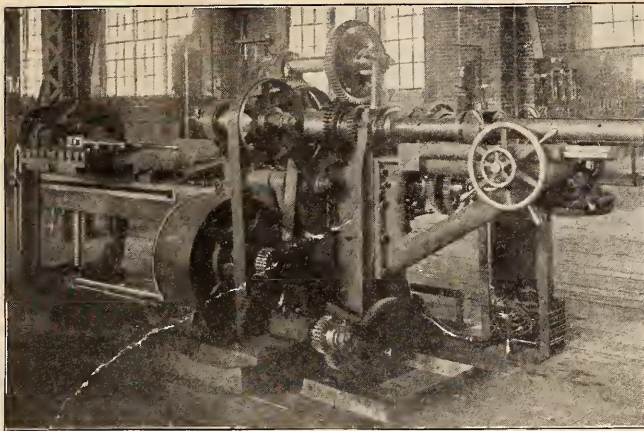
NILES HORIZONTAL BORING BAR, MOTOR DRIVEN—TERMINAL R. R. OF ST. L.
